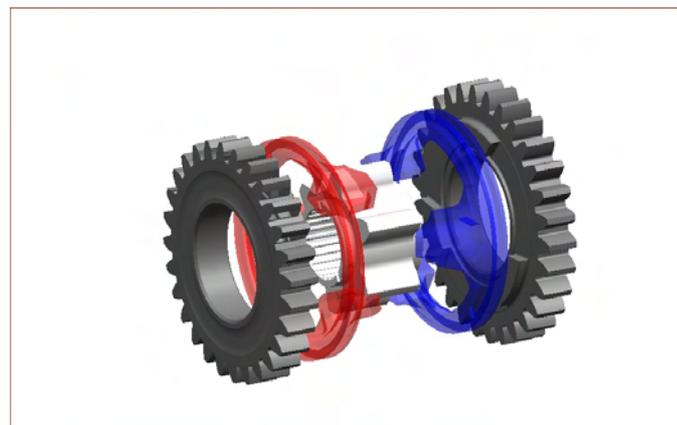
Exploded view showing pair of Zeroshift rings between two gears.
